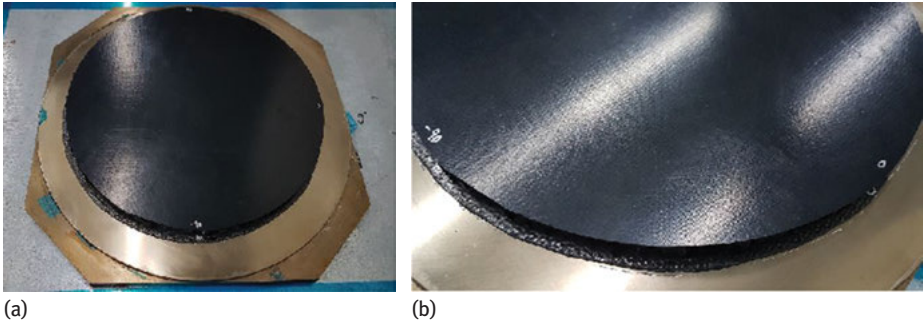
(a) Assembly after curing with the back skin in the top. (b) Detail of the back surface, where no cracks are visible after all the assembly operations.
